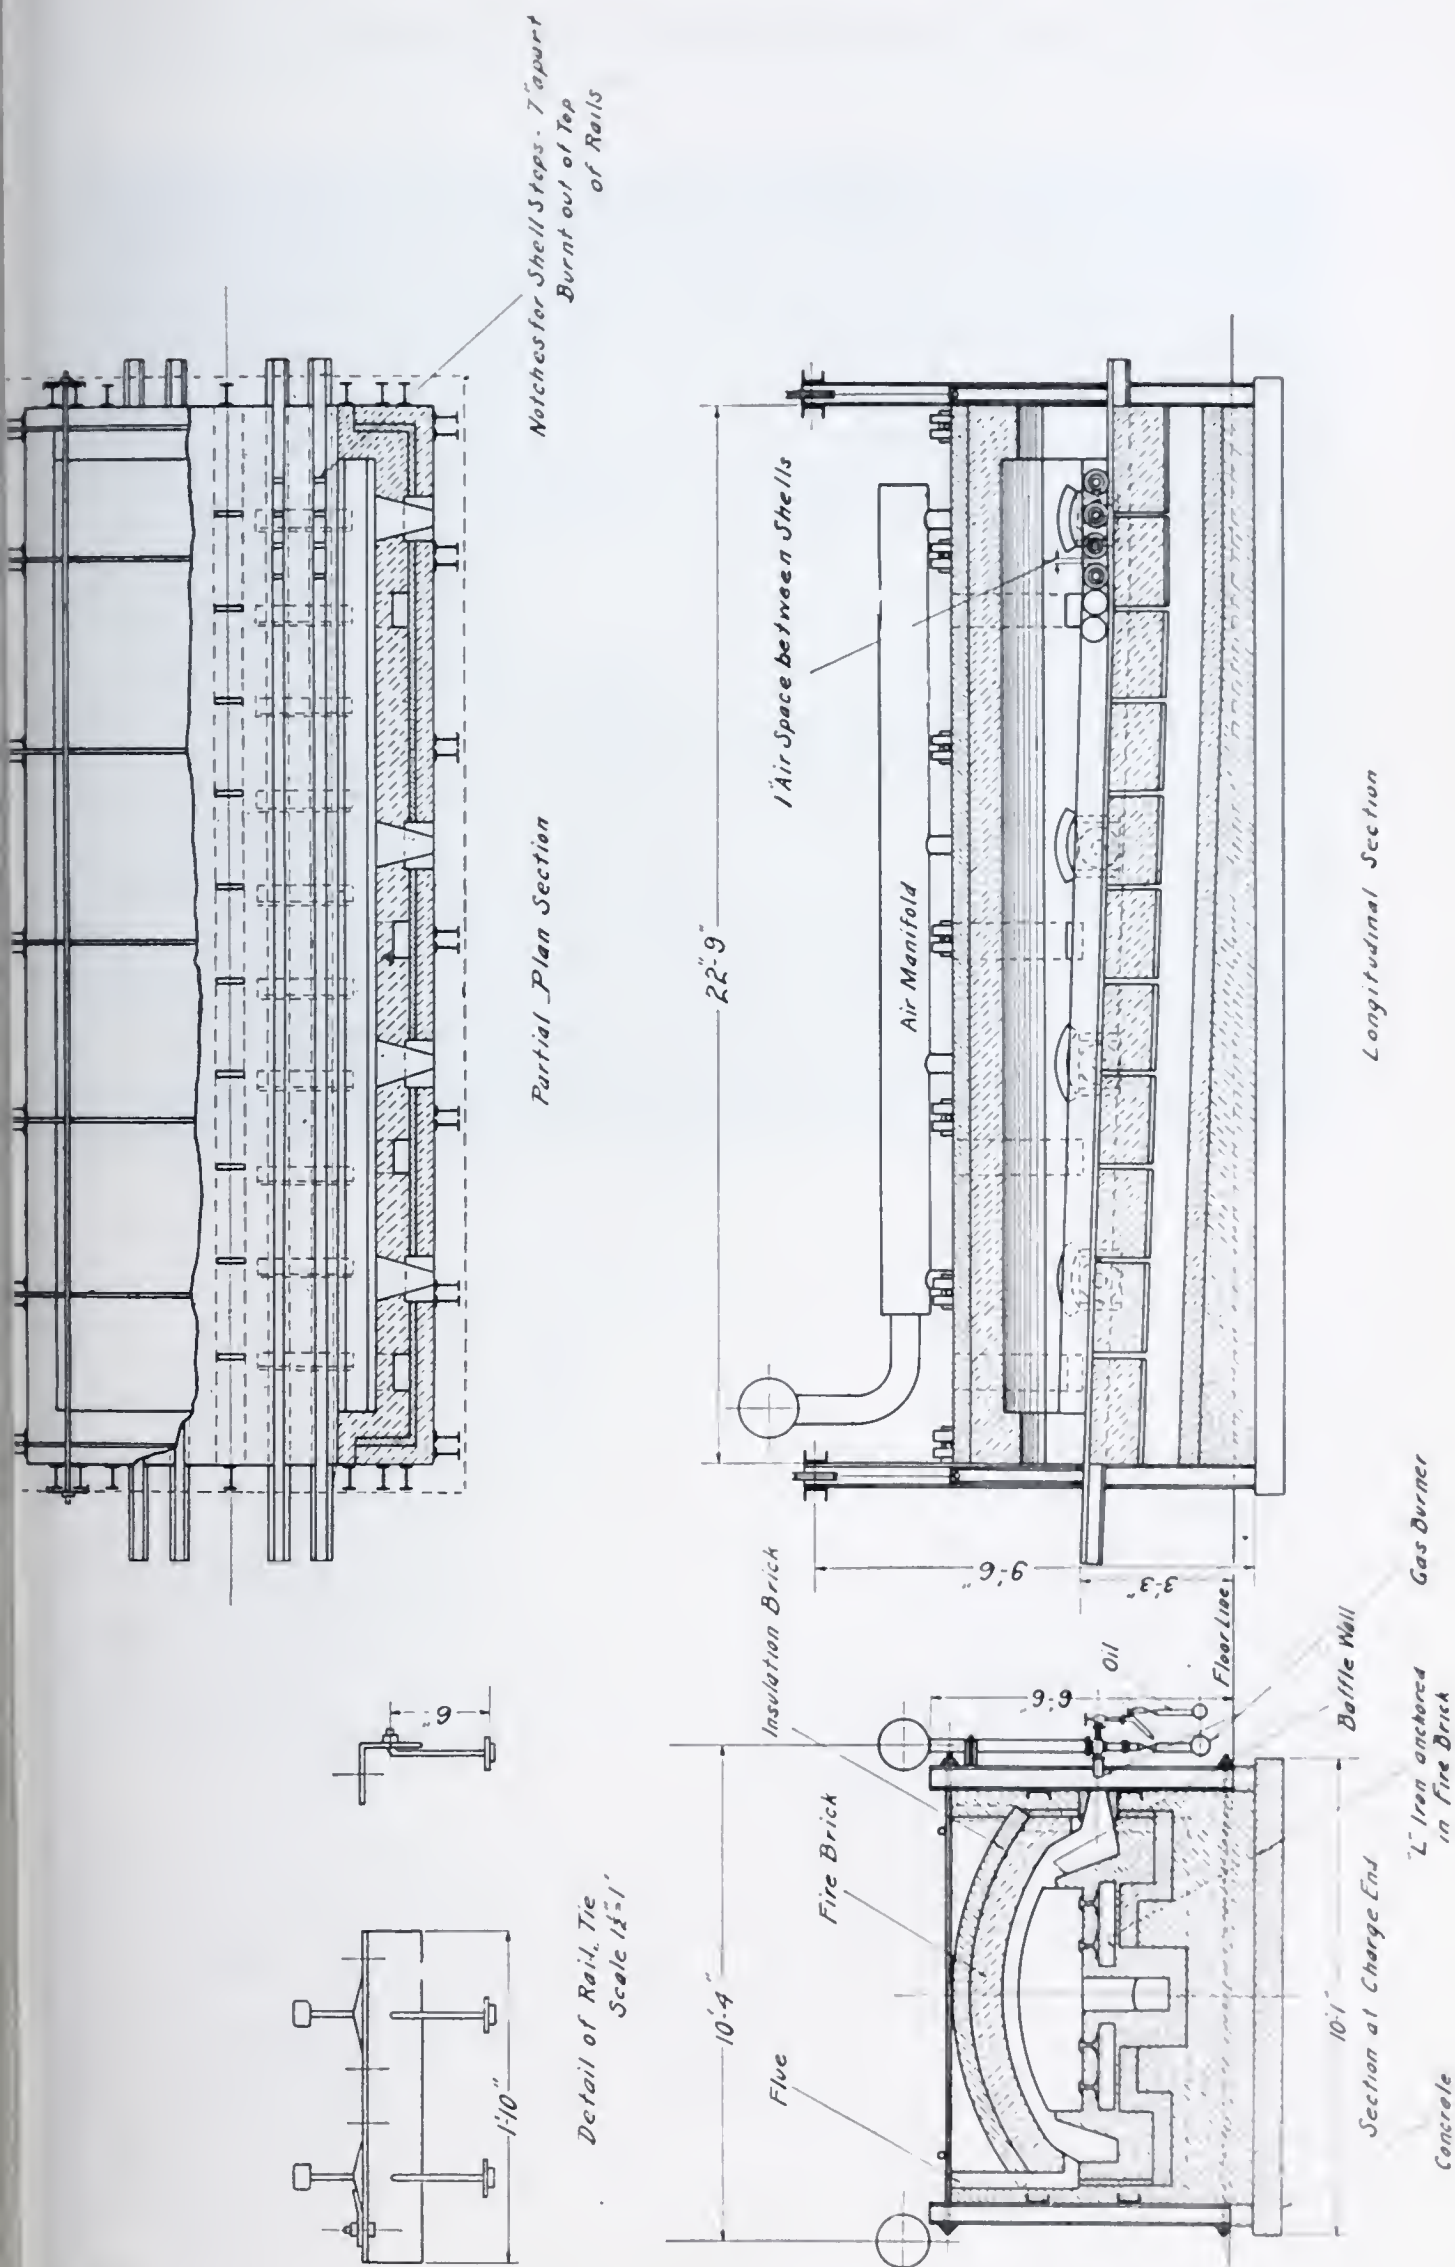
Heat-Treating Furnace for Six-Inch Shell. Over-Fired Type.
